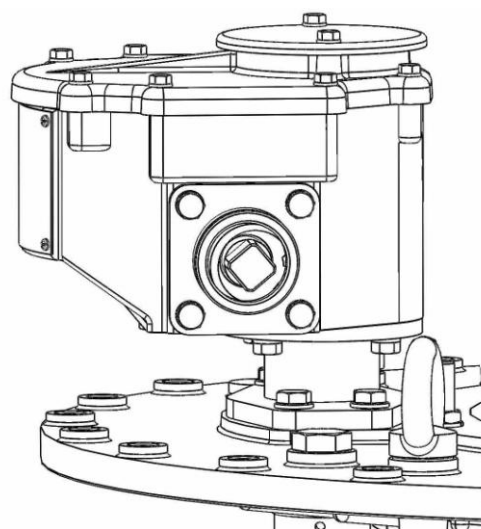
Turning the incoming shaft of the worm gear box for 8 revolutions
